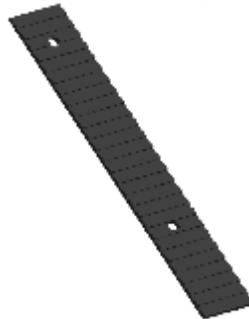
Basic Perspective View of Rubber Gasket Strip w/ bolt holes punched
